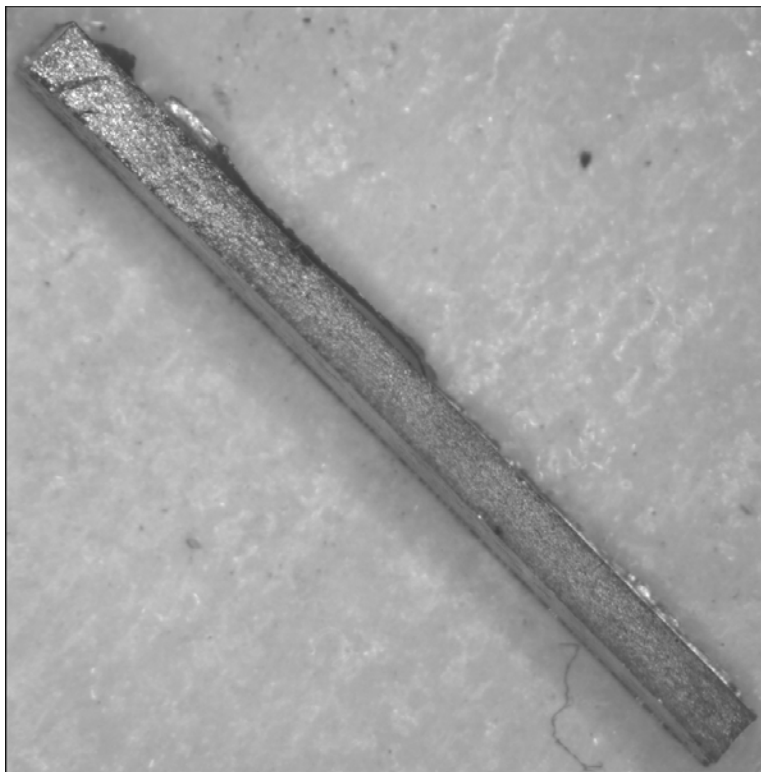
Fracture Surface of Specimen 5967.
